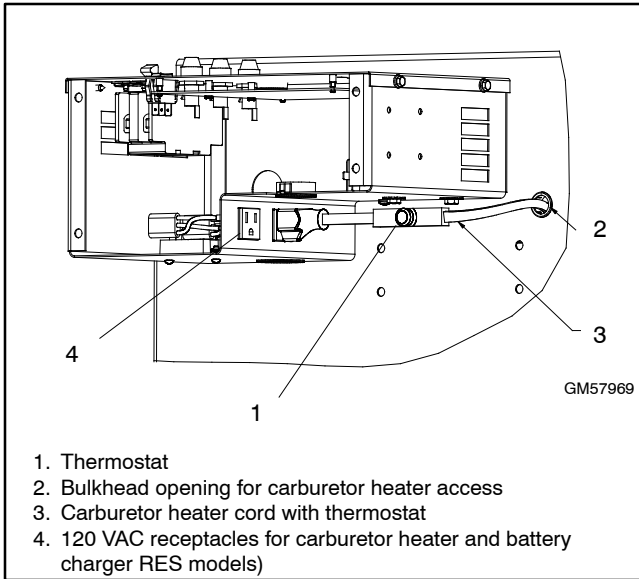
17/18 kW Carburetor Heater Location (air intake side of generator set)
